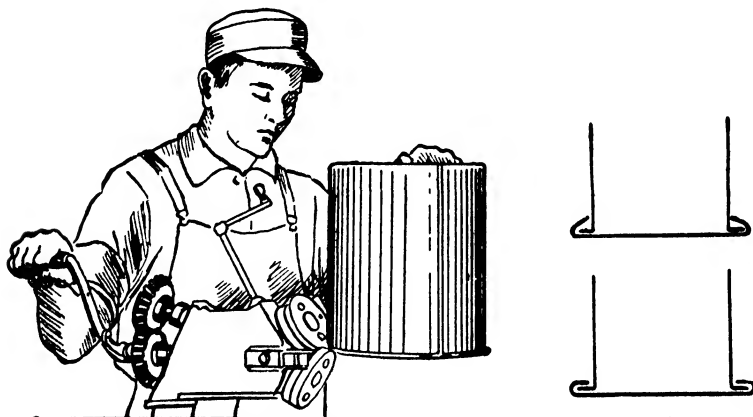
,791.—Burring machine and method of turning a burr. This is a difficult operation to master but practice will produce uniform flanges on sheet metal bodies and prepares the burr for bottoms preparatory to setting down and double seaming.
